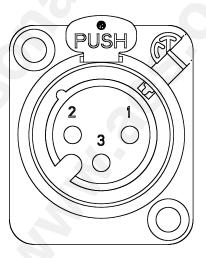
Fully coded female chassis connector, mates with a fully coded male cable connector only
